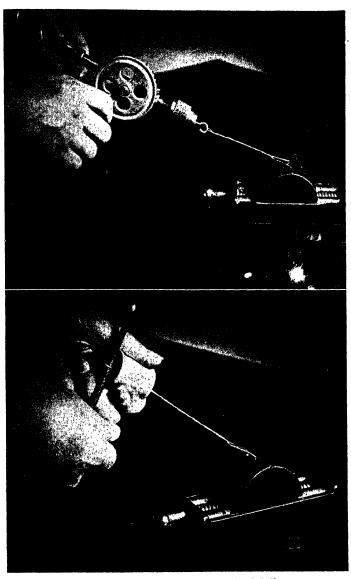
Twisting the wire with a hand drill Fig. 24.—Twisting the wire with a spool and rod 95
